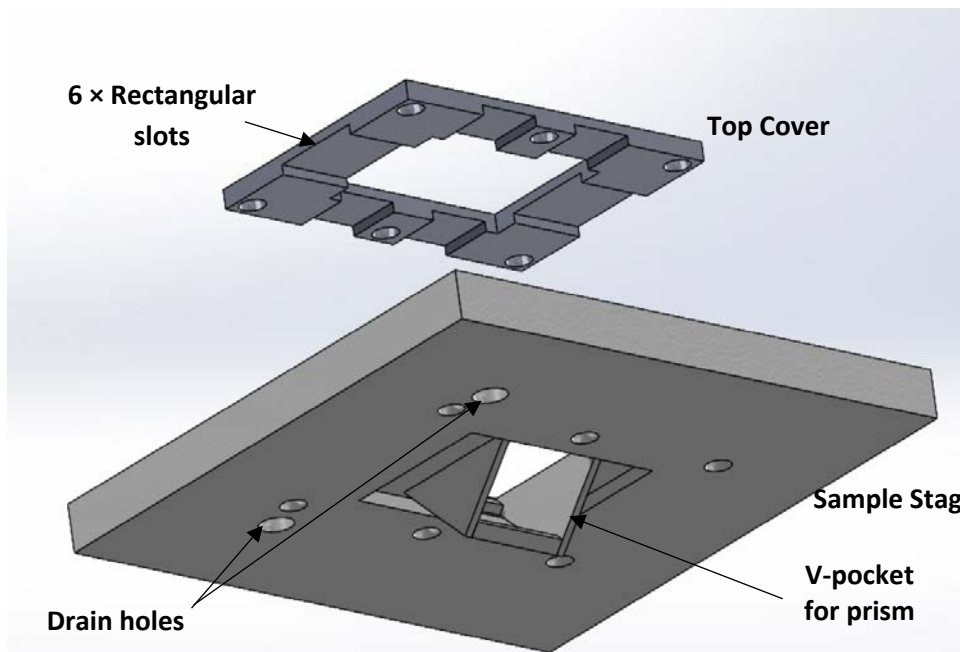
A screenshot presenting an angled view (as seen from the bottom) of the CAD assembly model featuring a sample stage and a top cover. A V-shaped pocket is modeled and designed to house the glass prism fully. Drain holes (in the sample stage) and rectangular slots (in top cover) are provided to prevent water stagnation in the sample stage.
